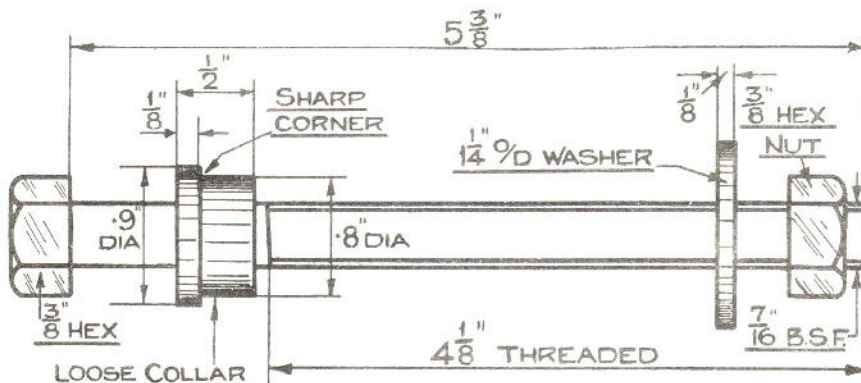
Tools for Removing and Fitting Stub Axle Bushes.
